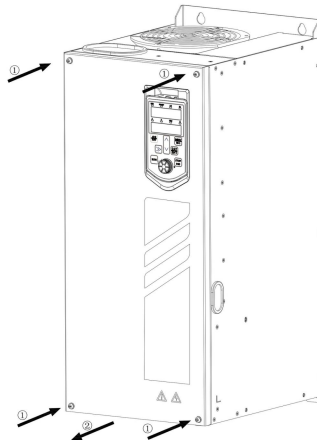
Schematic diagram of disassembly and installation of sheet metal housing cover plate
